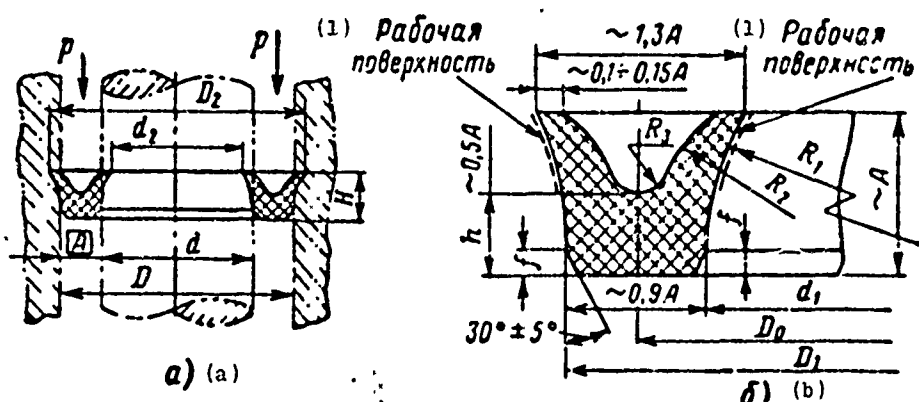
Rubber seal ring: a - basic dimensions of the seal ring unit ( $A$  - support width, determining the working clearance between shaft and housing); b - dimensions determining the shape of the seal ring (see GOST 6969-54). KEY: (1) Working surface.
